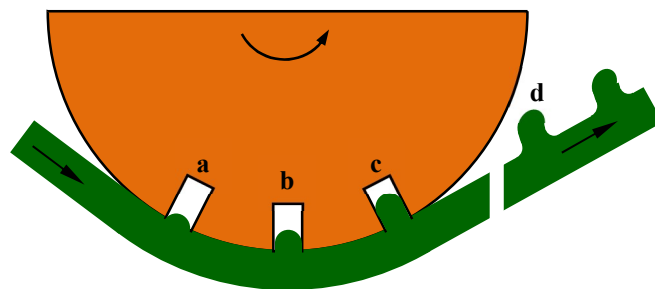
Formation of replication defects during thermal roller imprinting: (a) engaging; (b) imprinting; (c) incompletely filled cavity; (d) distorted structures.
